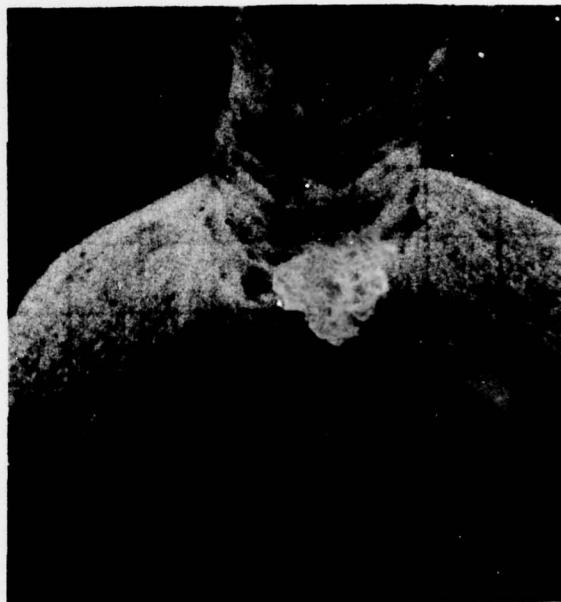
X50. Typical 90Pb 9Cd 1Zn Solder Joint in the As Soldered Condition
